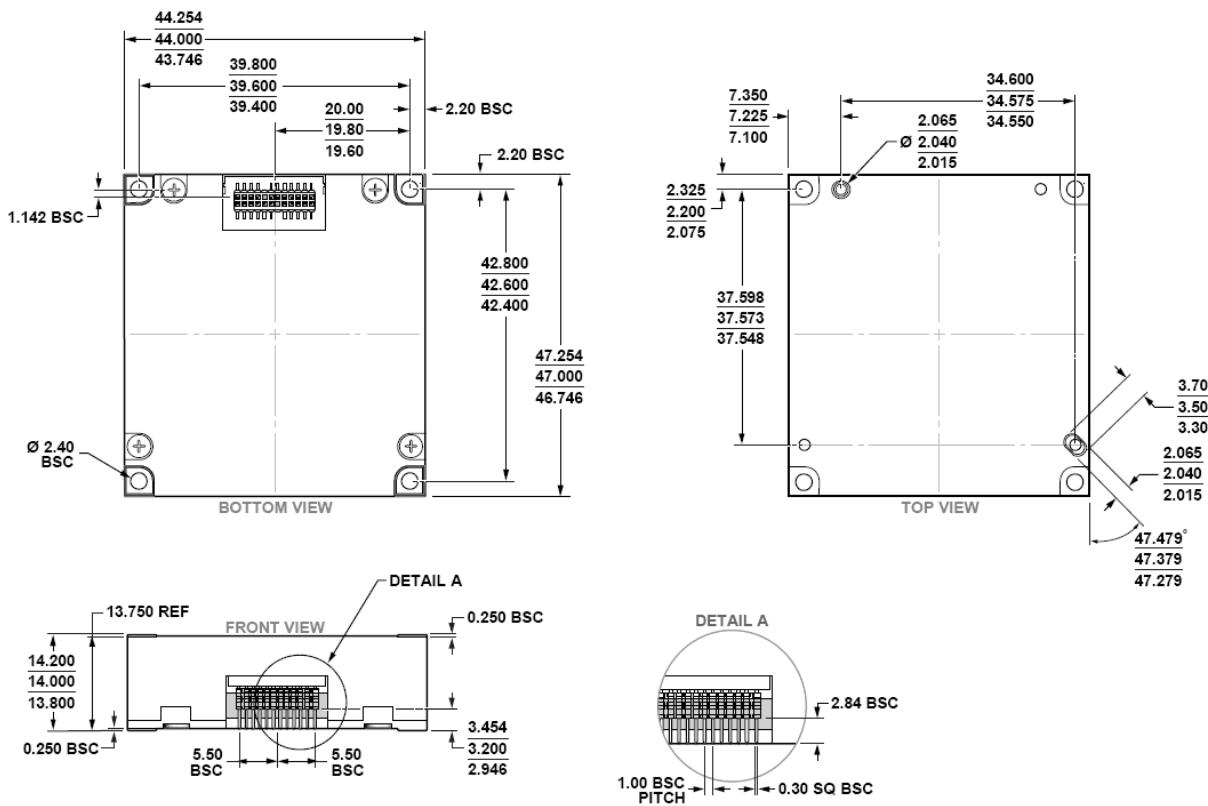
24-Lead Module with Connector Interface Dimensions shown in millimeters
